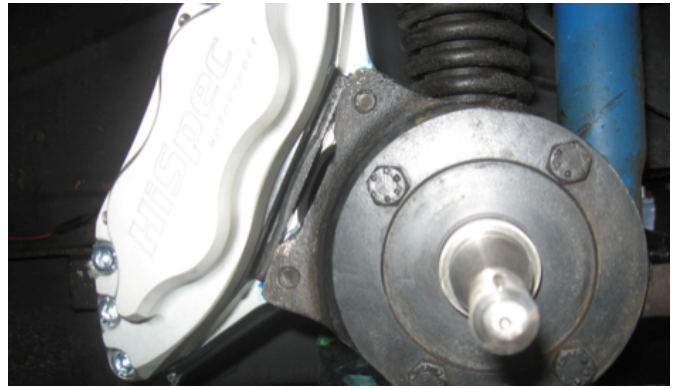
LHS. The rounded edges where the caliper is bolted to the LH caliper bracket must be ground (flattened) to clear the piston from the inner side of the caliper. This ensures enough play for free movement of the inner brake pad. Excess material has been removed using a 4 inches angle grinder.
